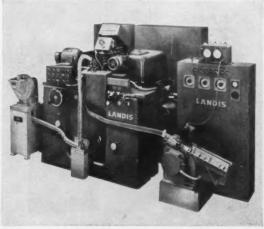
Fully automatic handling is provided on the Landis automatic "Concentric" grinding machine
